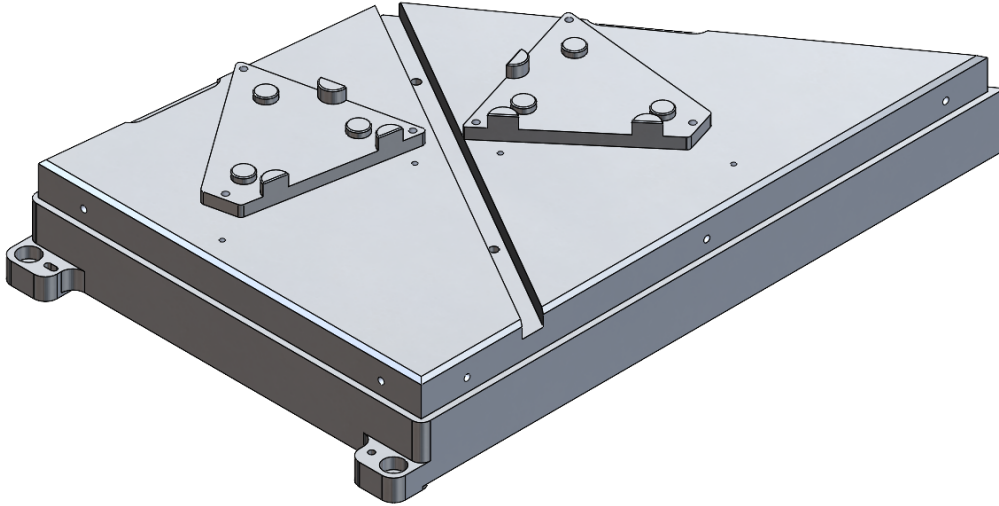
The prism base. A slot for the multi-choic mount is visible with machined prism locating points on either side. This piece was machined out of a single piece of 2.5" thick tool plate, the underside has been light-weighted to a 5mm wall thickness.
